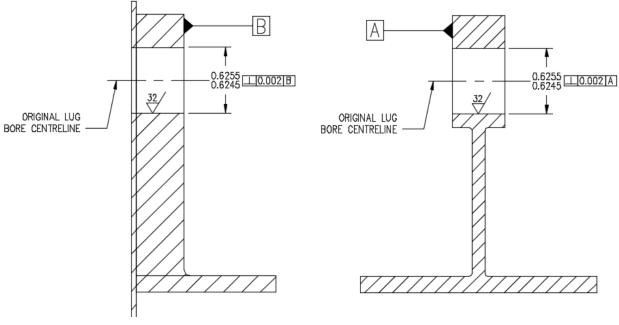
Modified Hinge and lug dimensions (in inches) Outboard Hinge (left), Centre and Inboard Hinge (right)
